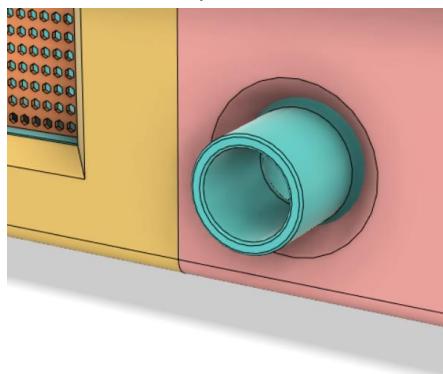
Before attaching the One-way Valve to the outlet of the PRM
